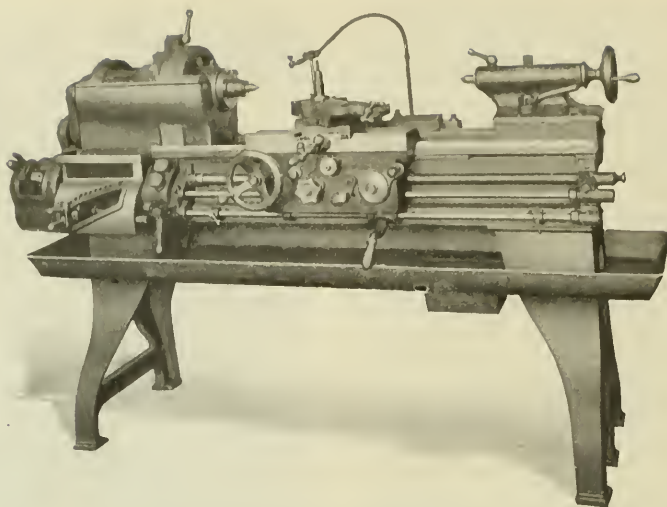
Davis "Close-coupled" Tool-room Lathe
